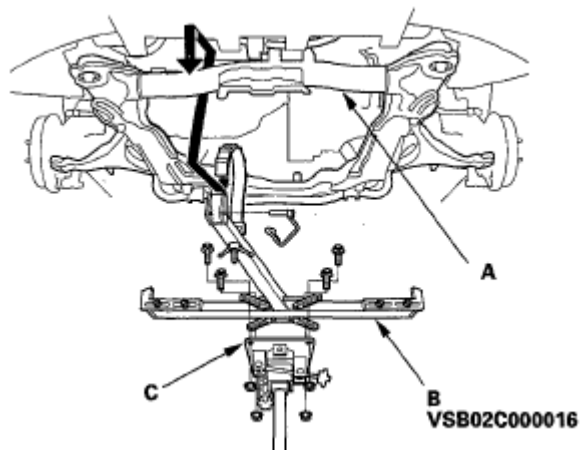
Identifying Front Subframe, Front Subframe Adapter And Jack
